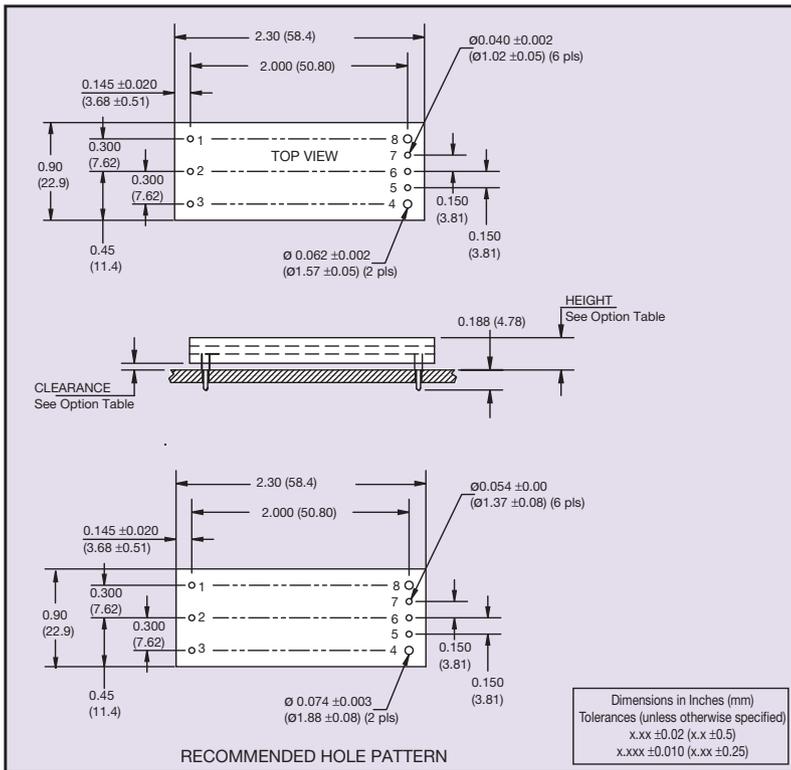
Through-hole Mechanical Drawing, Dimension Options and Pinout Table
